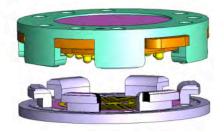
Universal Coupler, Concept 3. The complete concept 3 coupler is aligned for assembly. The pogo stick contacts are visible as are the five conducting rings on the proximal circuit board. The spring loaded lock ring is shown in the position it attains after the two halves are pushed together.
